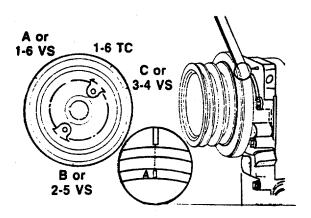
Aligning Pulley and Gear Pointer.
